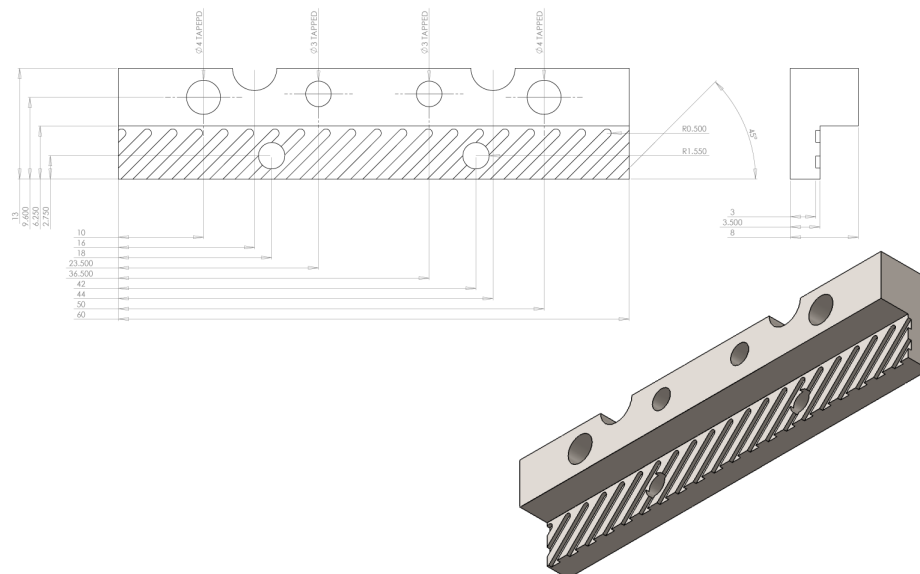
A SolidWorks drawing of the bottom aluminium clamp.
